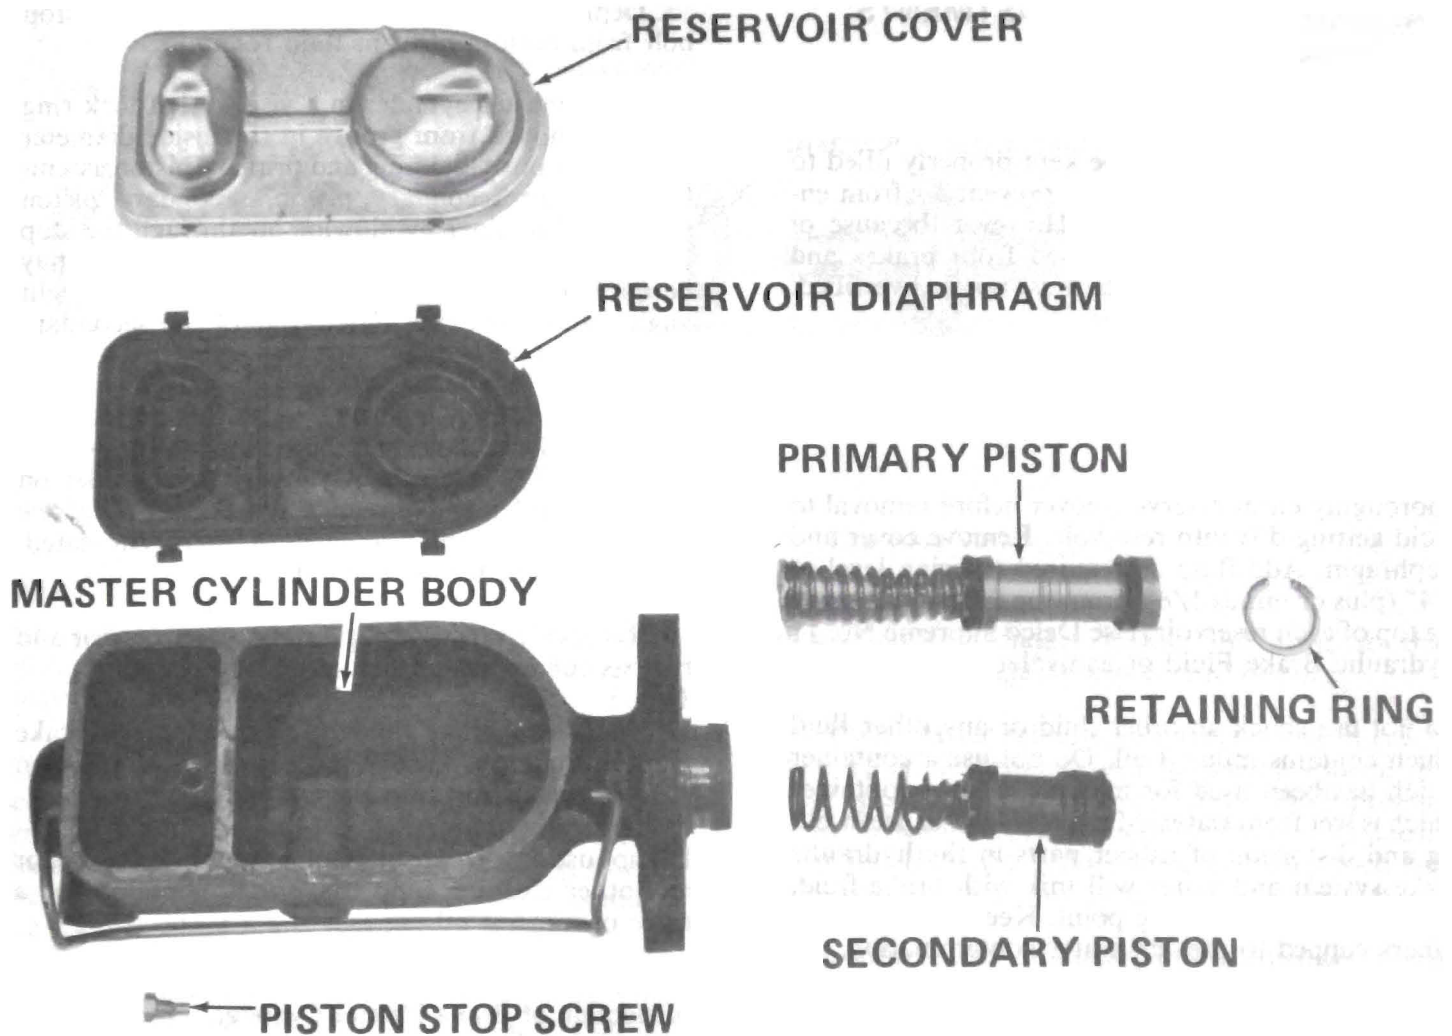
C-1 Exploded View - Power Brake Master A-B-C and E Car
